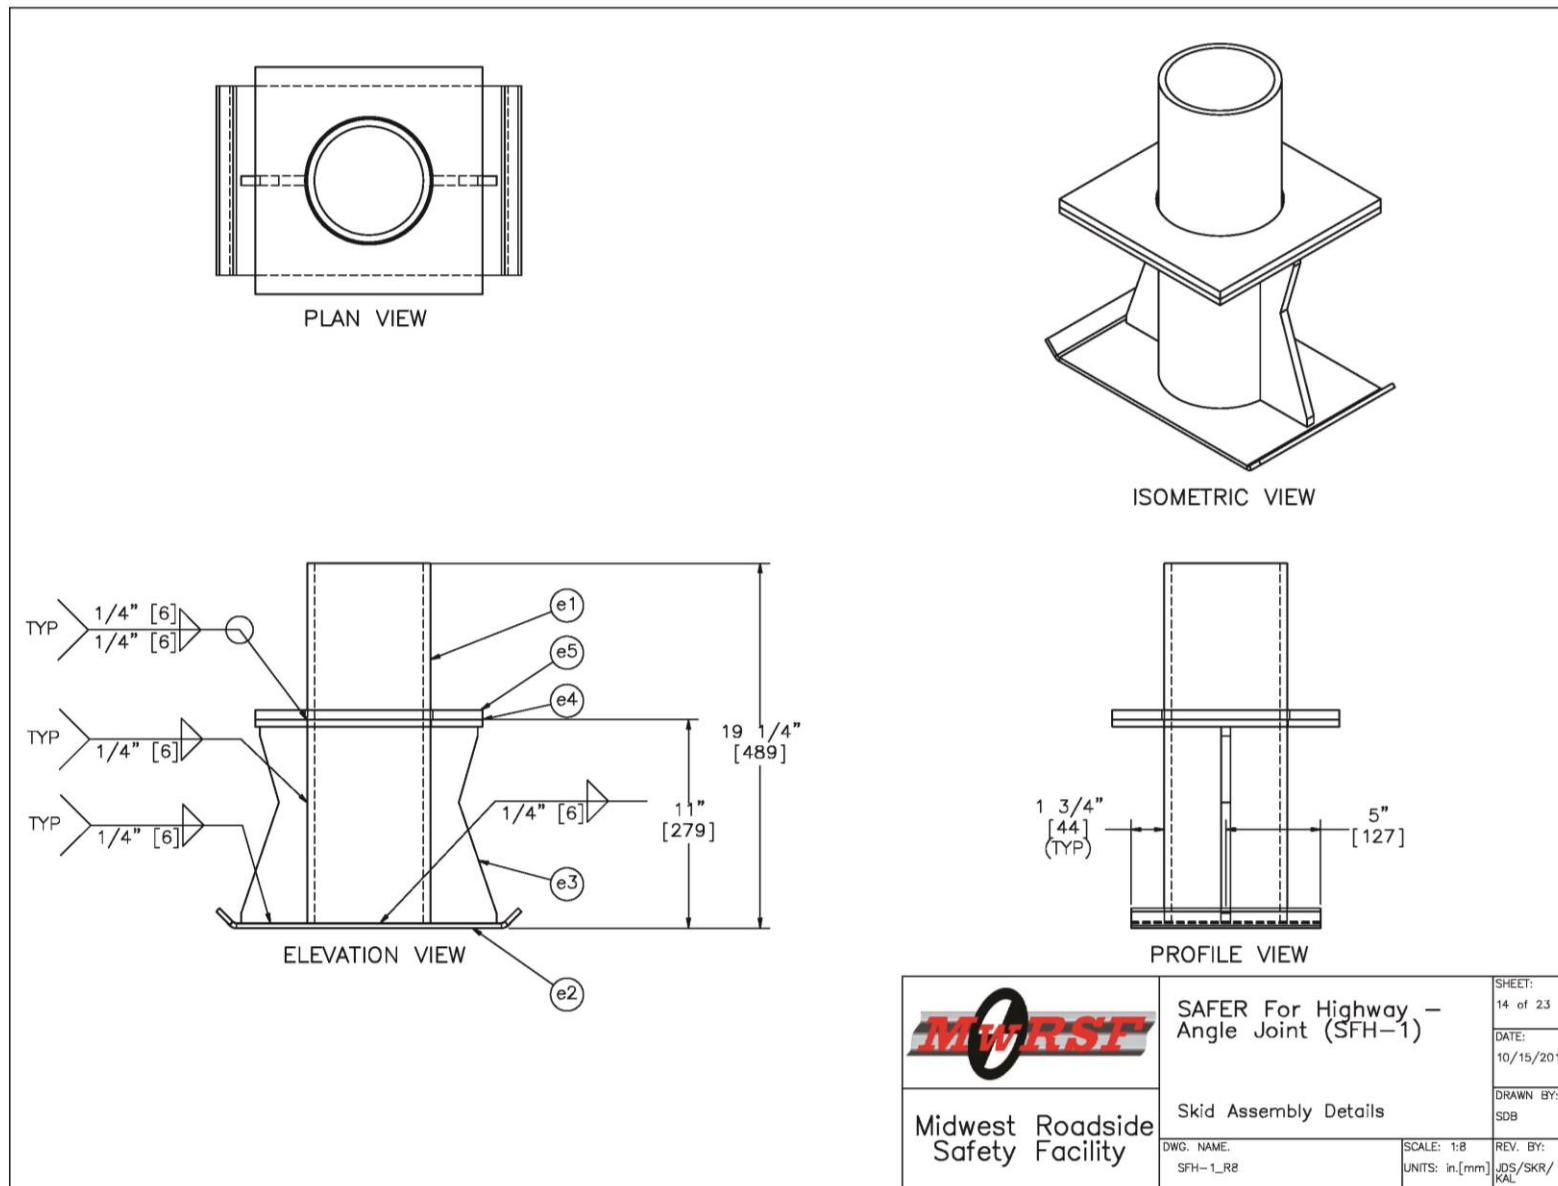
Recommended Barrier Design for Full-Scale Crash Testing, Skid Assembly Details
